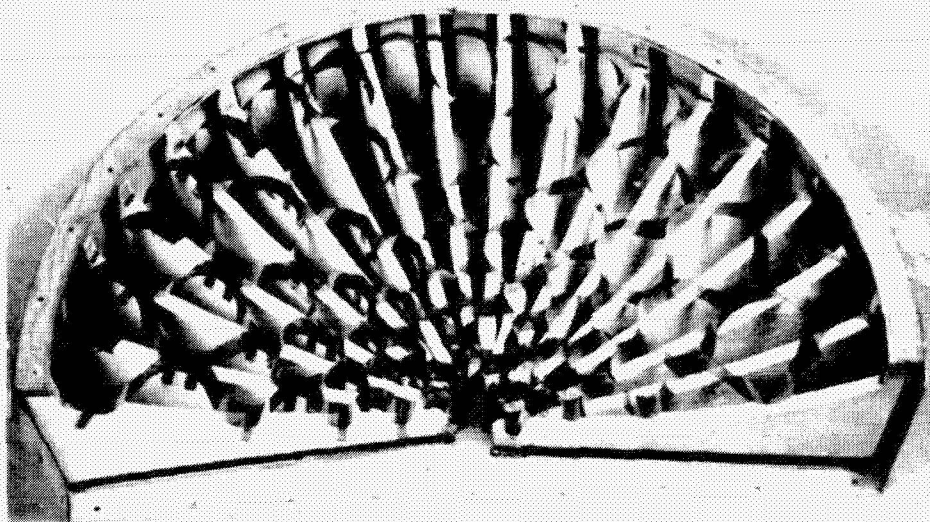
Assembly Tool with Core in Place for Aluminum Dome Panel
